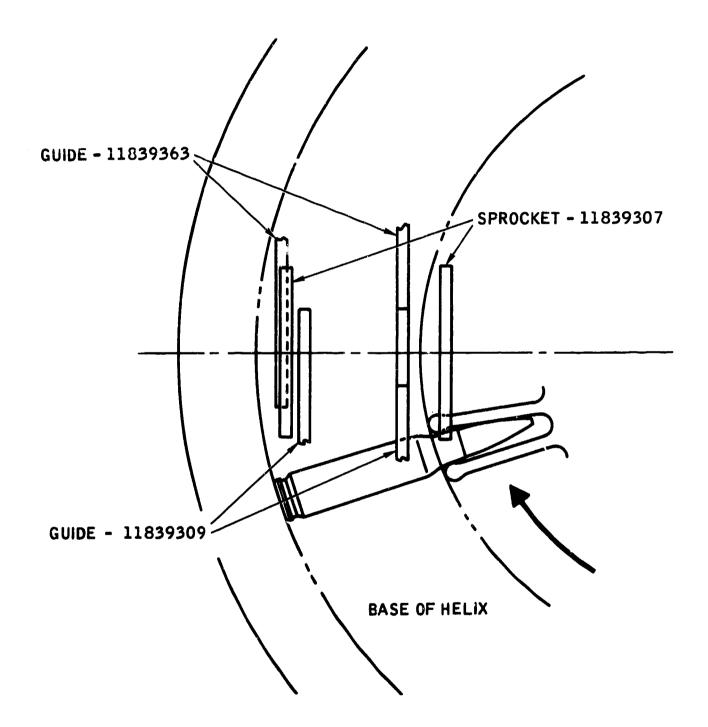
(Sheet 1 of 2) Design Study of Inner Drum to Exit Sprocket Handoff
